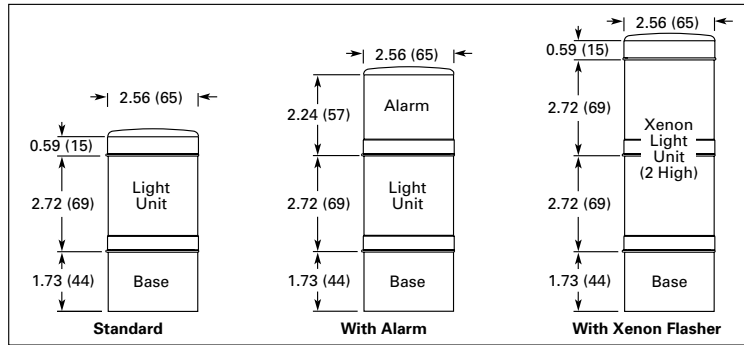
Approximate Dimensions in Inches (mm) — One-Light Unit Stacklight
